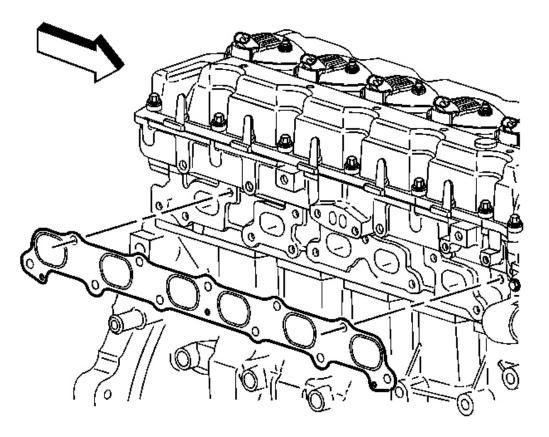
View Of Exhaust Manifold Gasket Courtesy of GENERAL MOTORS CORP.
